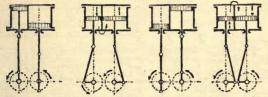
Woolf Engine, with cranks opposite (180'), without receiver.
